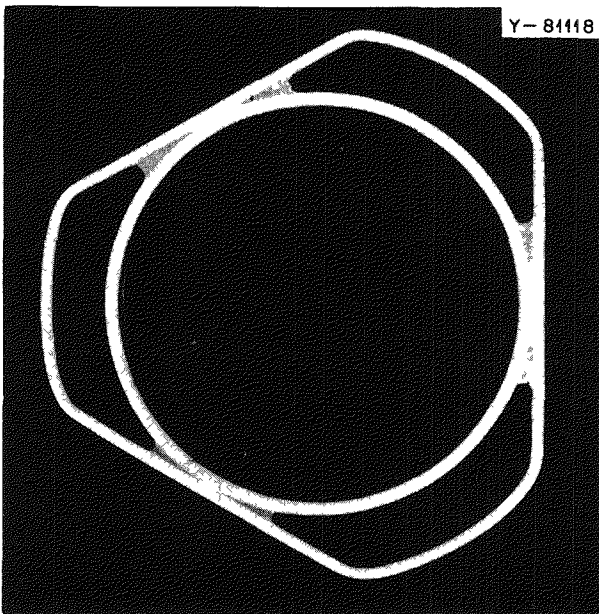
Cross Section of a Typical BONUS Spacer-to-Tube Brazed Joint. 5X. As polished. Reduced 17%.
